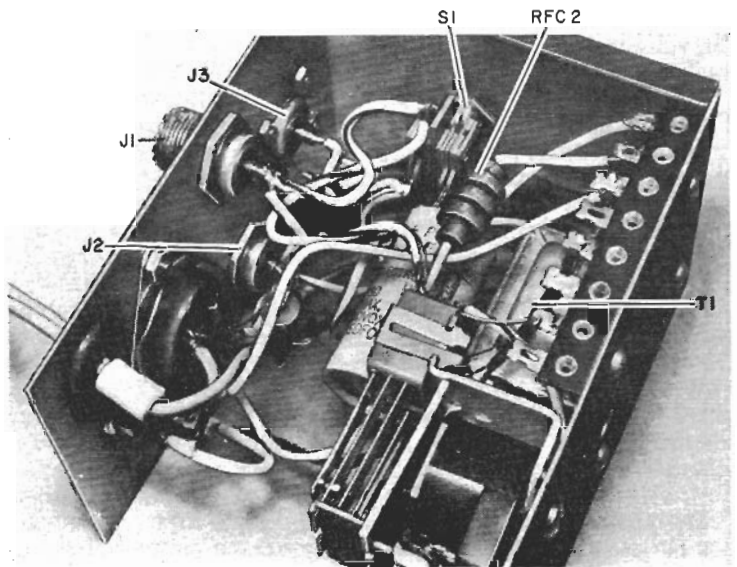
Component mounting is best accomplished if ends of chassis are bent slightly outward during machining and chassis wiring.
